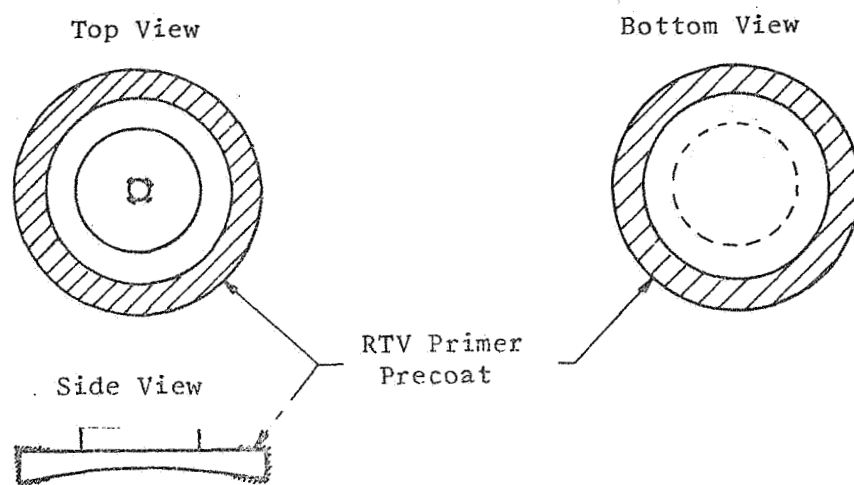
PRECOAT AREAS ON ATTACHMENT BLOCK AND SPECIMEN.
